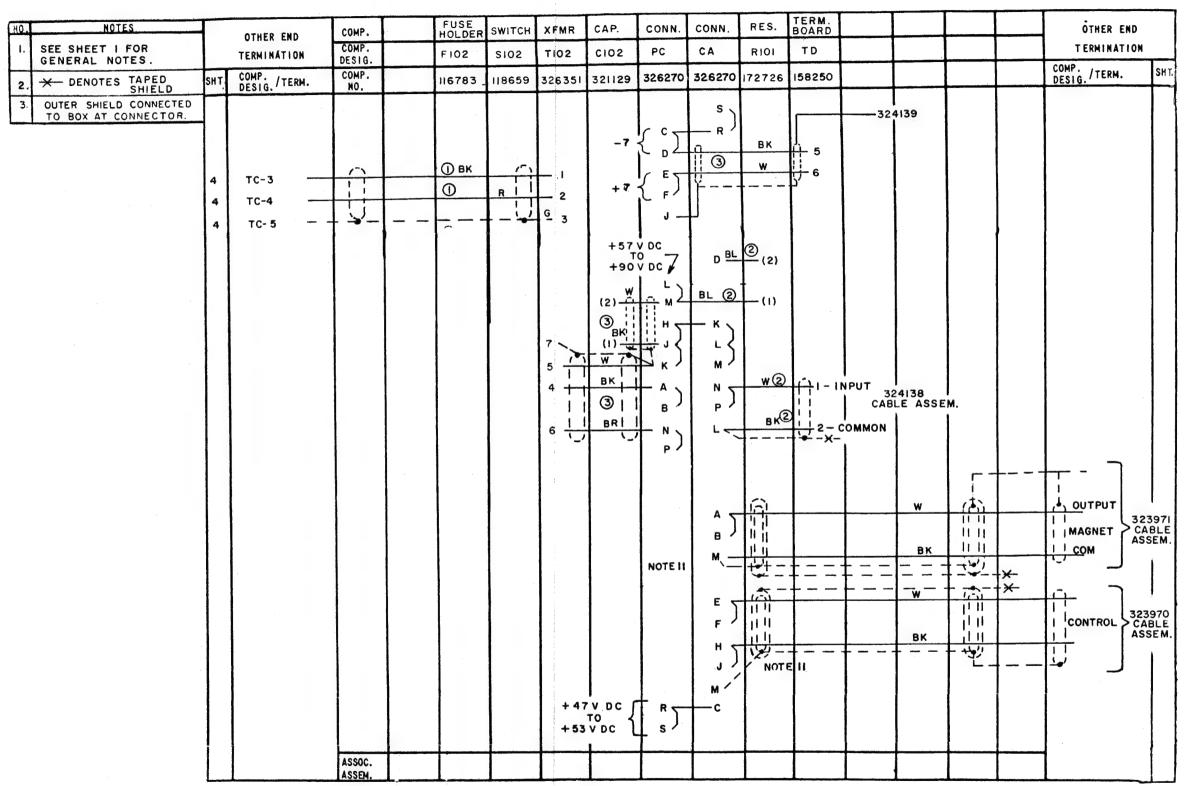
321230 Electrical Service Assembly (Clutch) Wiring Diagram (Sheet 3 of 4)
